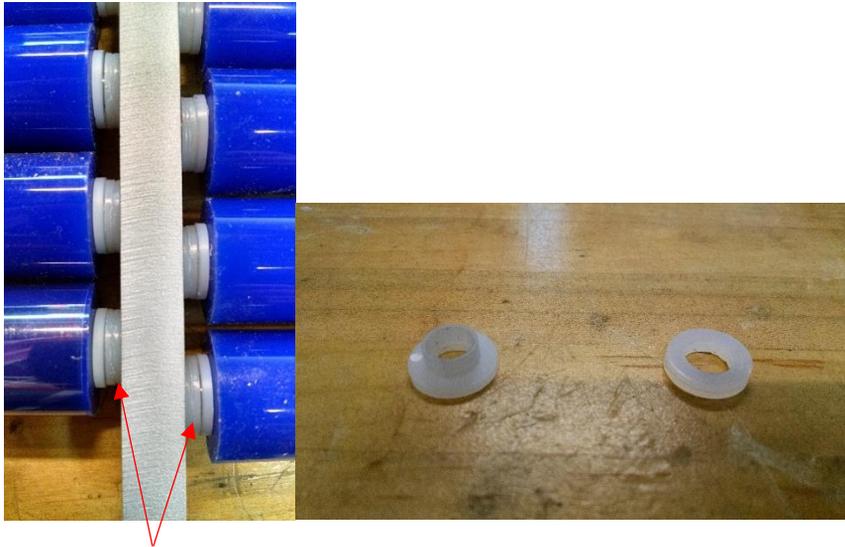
Left image - Properly assembled roller assembly. Right image - Nylon sleeve bushing on left. Nylon washer on right.
